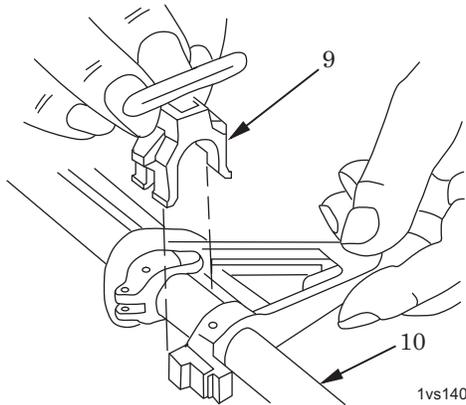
Removal/Installation of Swivel Mount (Carbine).
